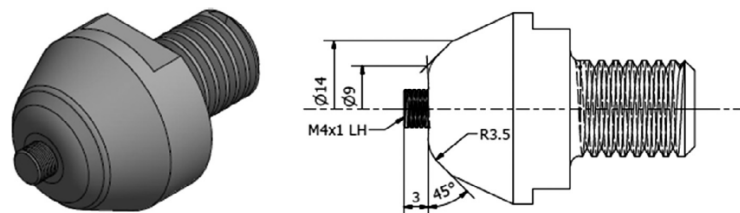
Tool geometry used for processing GMAW welds (dimensions in mm).
